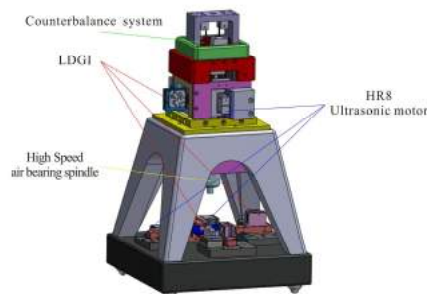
Schematic of the meso-scale 3-axis milling machine tool and its control system.
